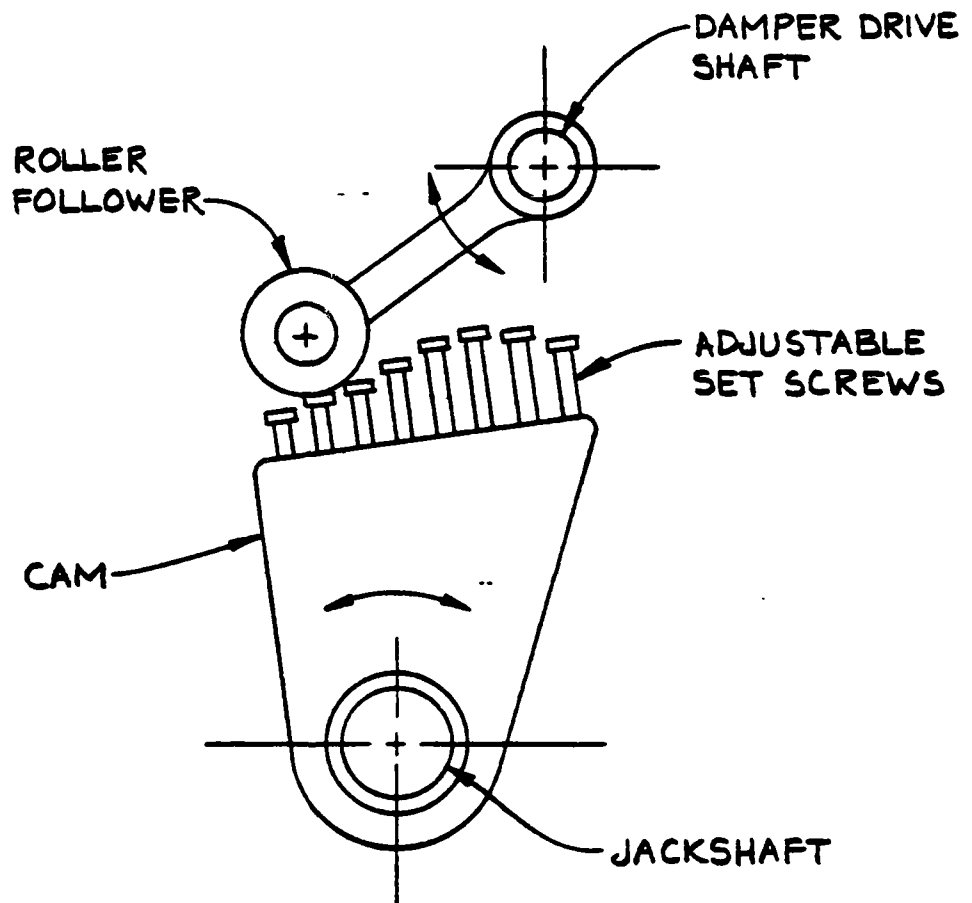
ADJUSTABLE JACKSHAFT
